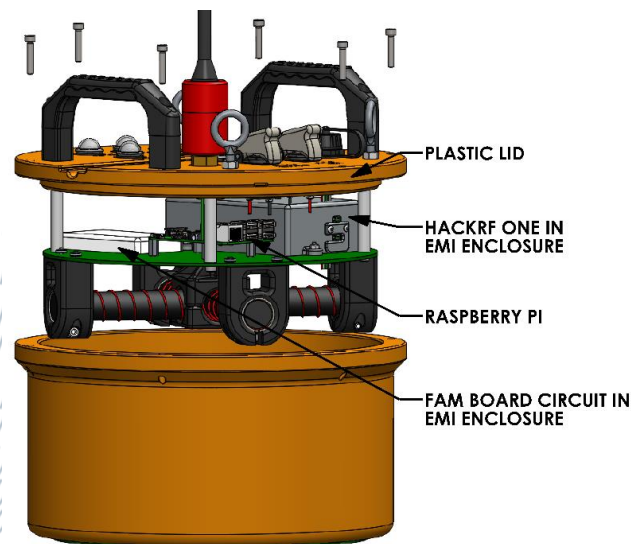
Exploded view of the initial prototype puck design, with the electronic boards mounted to the FAM board
